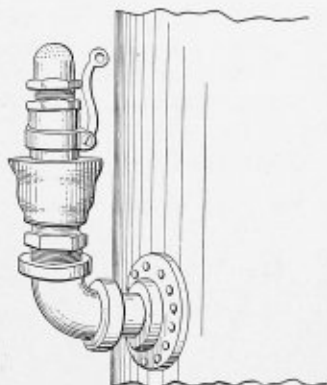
Illustrating Method of Mounting Safety Valve to a Side-Outlet Connection so that the Valve Remains in a Vertical Position
